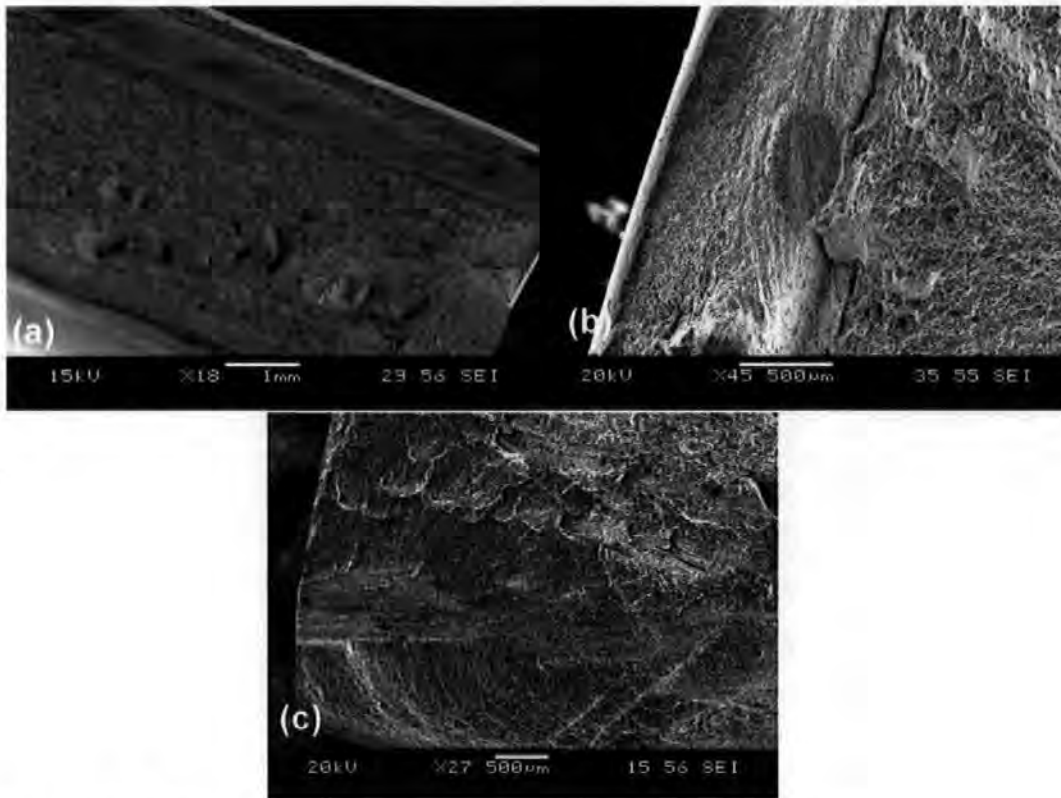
Planar facets for (a) weld 2 (b) weld 3 and (c) weld 9.
